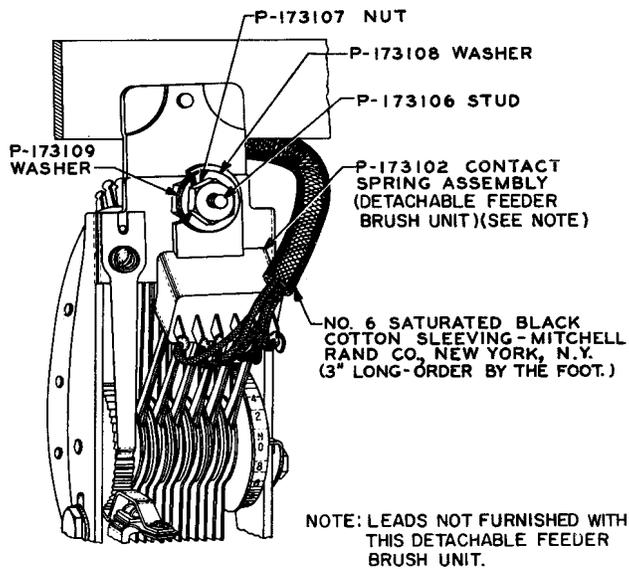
Detachable Feeder Brush Unit and Associated Parts for 206BE Selector Only
